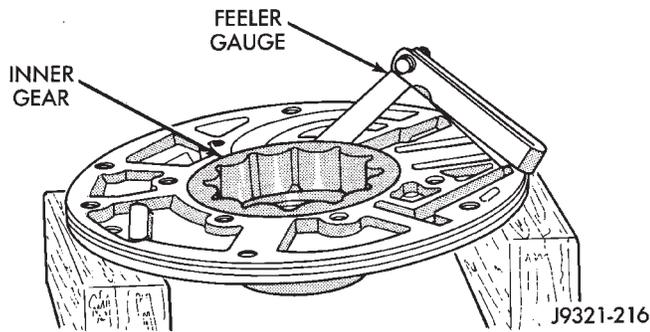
Measuring Pump Housing-To-Inner Gear Clearances
